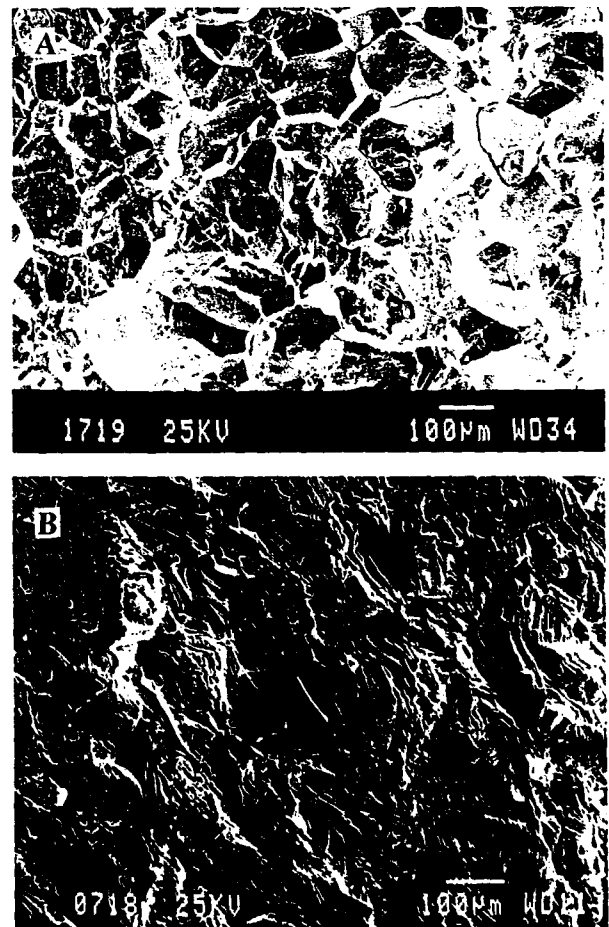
Typical fracture surfaces in both air (A) and vacuum (B) at 650°C [17].
